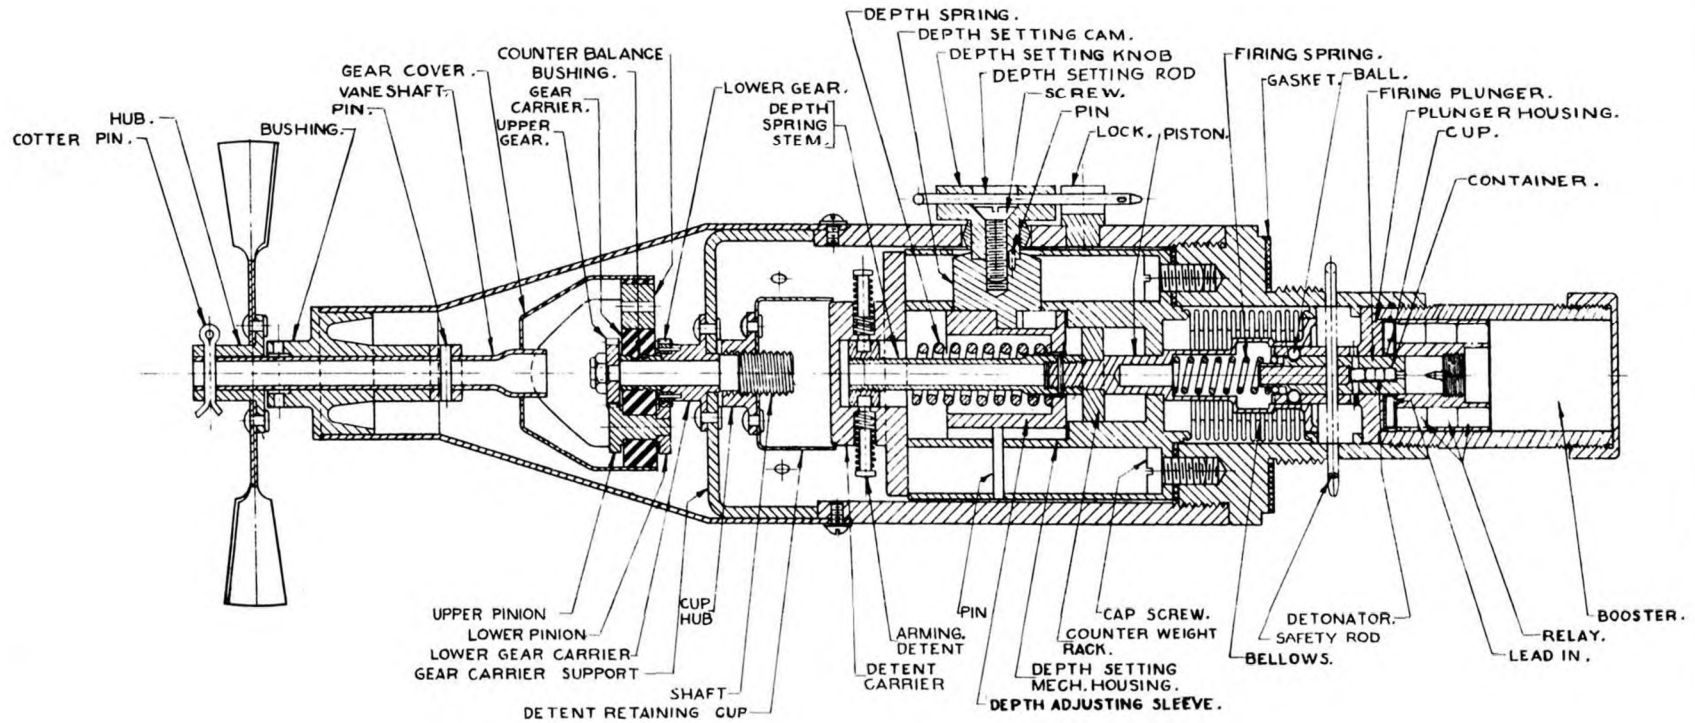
FUZE, BOMB, TAIL, HYDROSTATIC MARK 229: GENERAL ARRANGEMENT DRAWING (ARMED POSITION).
